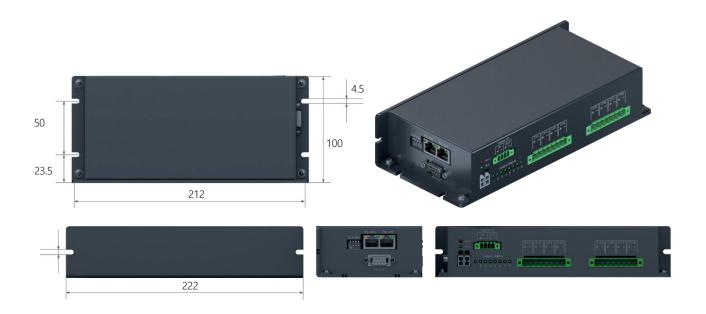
Mechanical Dimensions (in mm) for 8ch controller
